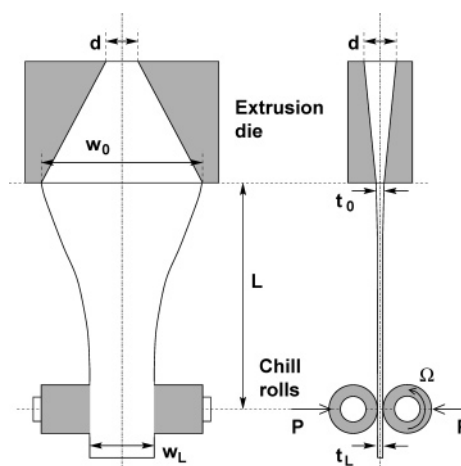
Schematic drawing of sheet extrusion die and chill rolls.
